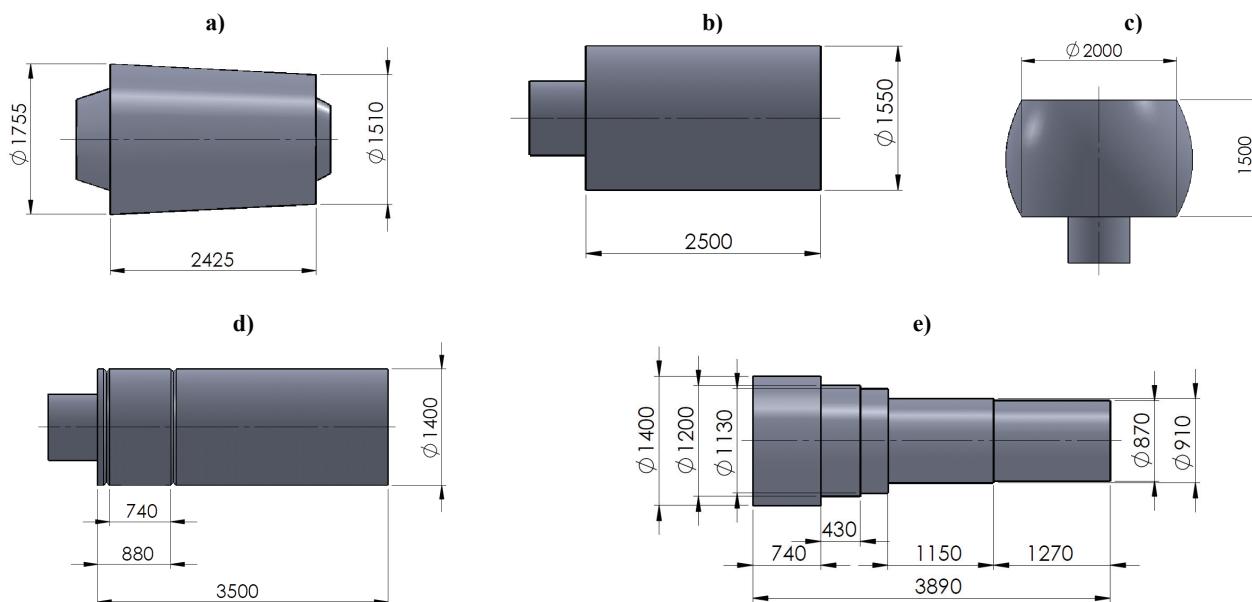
Forging operations sequence in open-die forging of the windmill main shaft: a) ingot, b) preliminary smoothing of ingot draft, c) upsetting, d) cogging, e) drawing out of the offset sections (Lisiecki, 2012).
